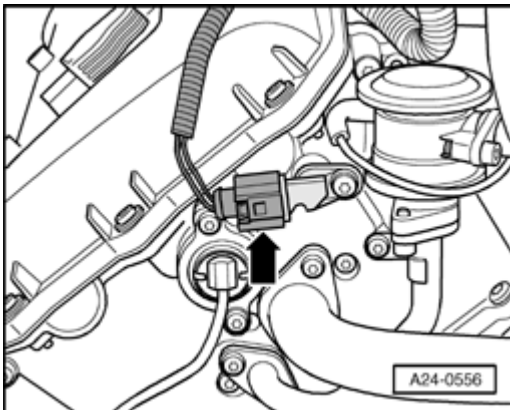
Disconnecting Electrical Harness Connector For Camshaft Position (CMP) Sensor 2 G163 On Left Cylinder Head
